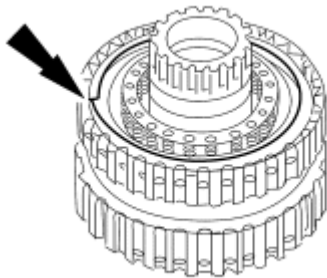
Direct Clutch Pressure Plate Retaining Ring
